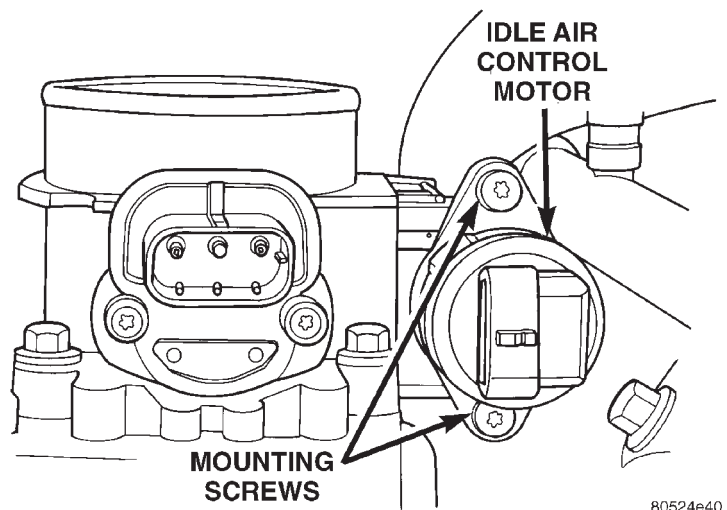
Mounting Bolts (Screws)—IAC Motor—4.0L Engine
